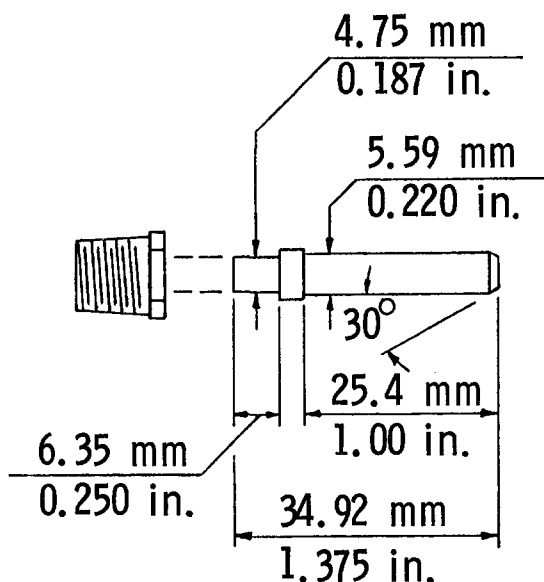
Construction details for injector, for 5.41-mm (0.213-inch) diam drilled hole, used in 1976 and 1977 field tests. Machine from type 304 stainless steel tube, 6.35-mm (0.250-inch) outside diam X 2.13-mm (0.084-inch) wall. Insert into one-half of a 3.175-mm (0.152-inch) pipe hex nipple, type 316 stainless steel, and silver-solder together.
